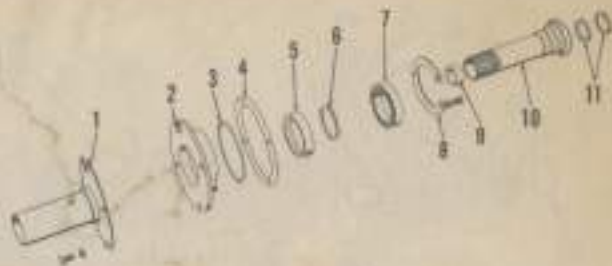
Exploded view of the hydraulic pump drive used on Series IV D-17 tractors. Parts (17, 18, 19, 20 and 24—Fig. 96) are not used and plunger hydraulic pump drive cams on shaft (27) are omitted on Series IV D-17 models.
